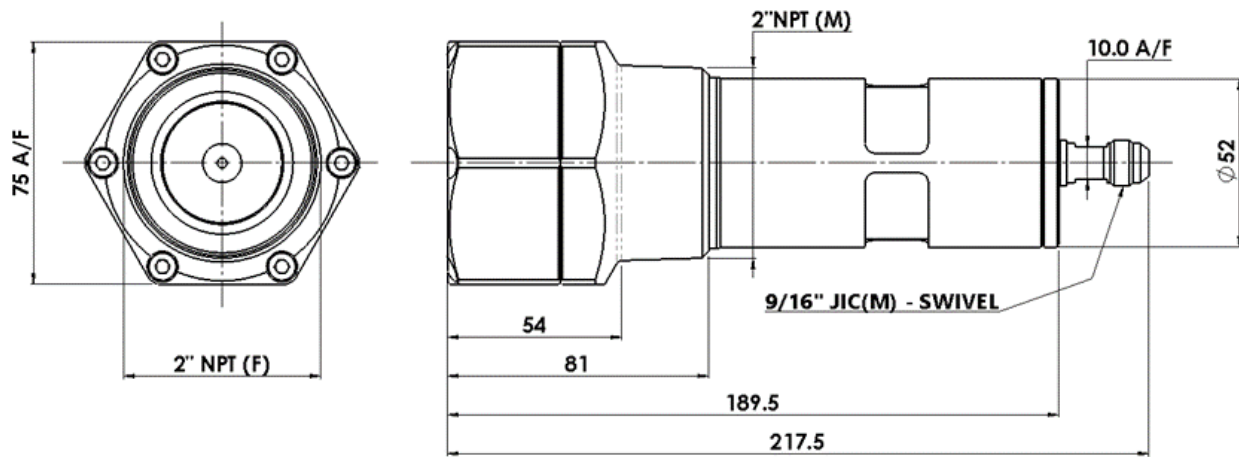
Key Dimensions of the BFCV50NPTF Valve
